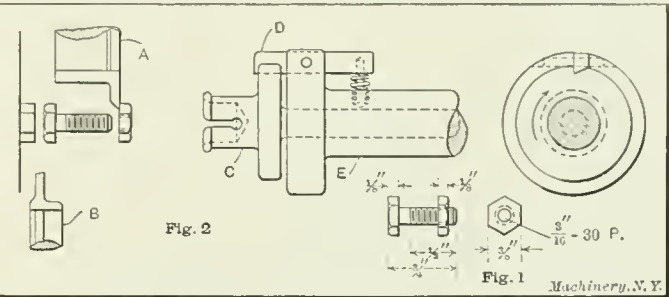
Nut and Bolt to be made and assembled. Fig. 2. Method of Applying the Circular Tools and Construction of the Carrier or Assembling Tool
